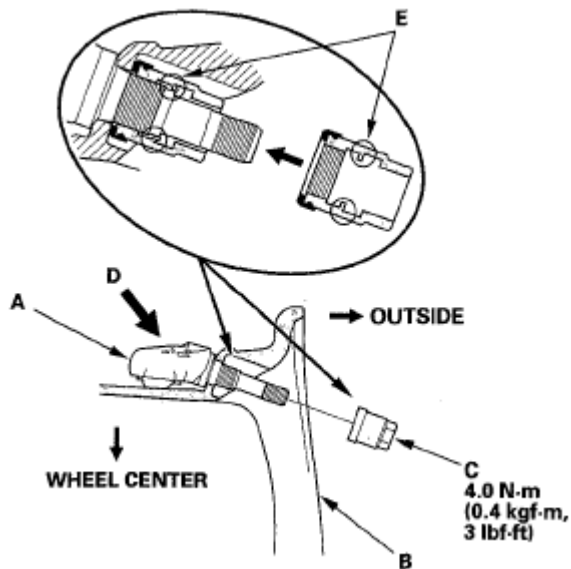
Identifying Positioning Of Tire Pressure Sensor With Torque Specifications
